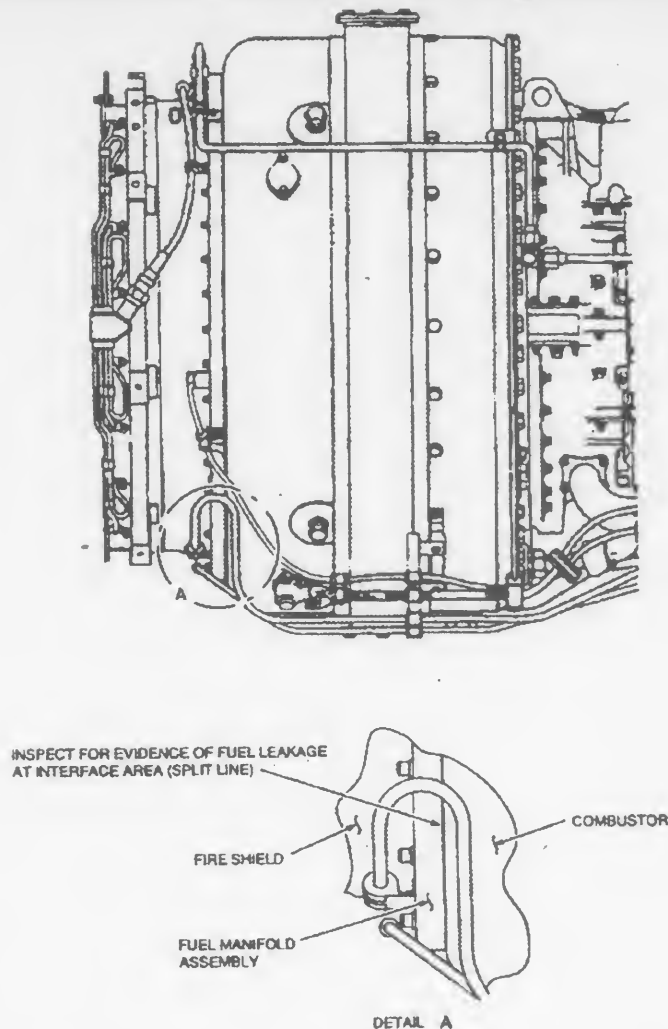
Fuel Manifold Assembly-to-Fire Shield Interface Area
